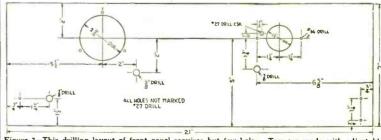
This drilling layout of front panel requires but few holes. Two are made with adjustable panel cutter.
